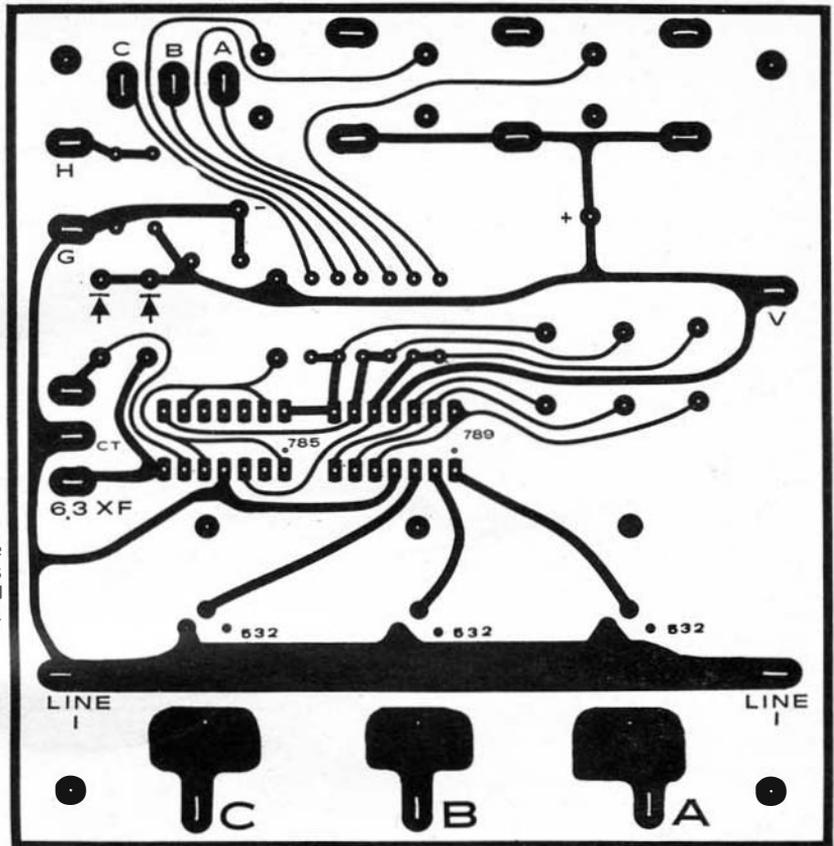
This foil pattern for the PCU PC board is actual-size and can be reproduced.
